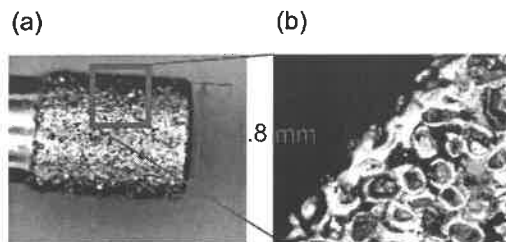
(a) An electroplated diamond core drill with the outer diameter of 4.8 mm. (b) Diamonds coating on the surface of the drill.
